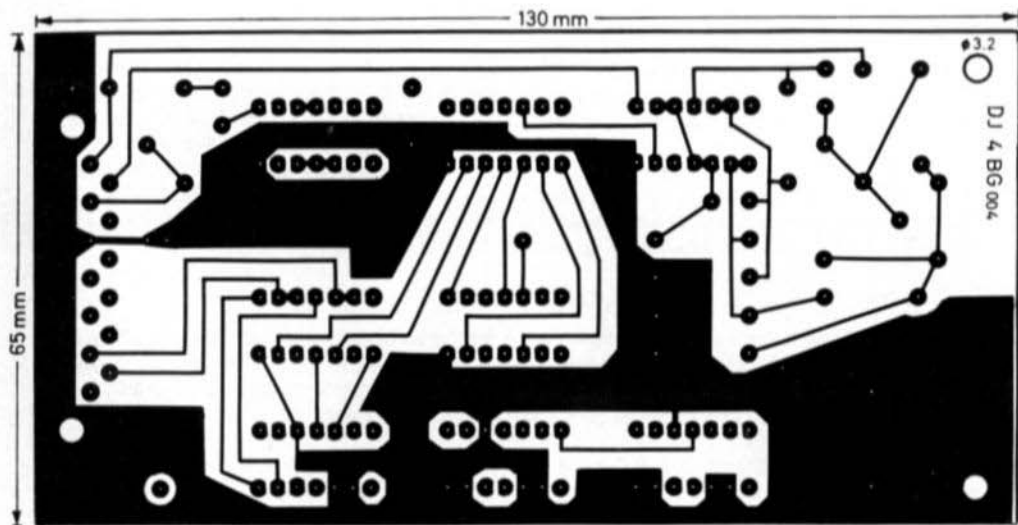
PC - board DJ 4 BG, double-coated, with through-contacts
